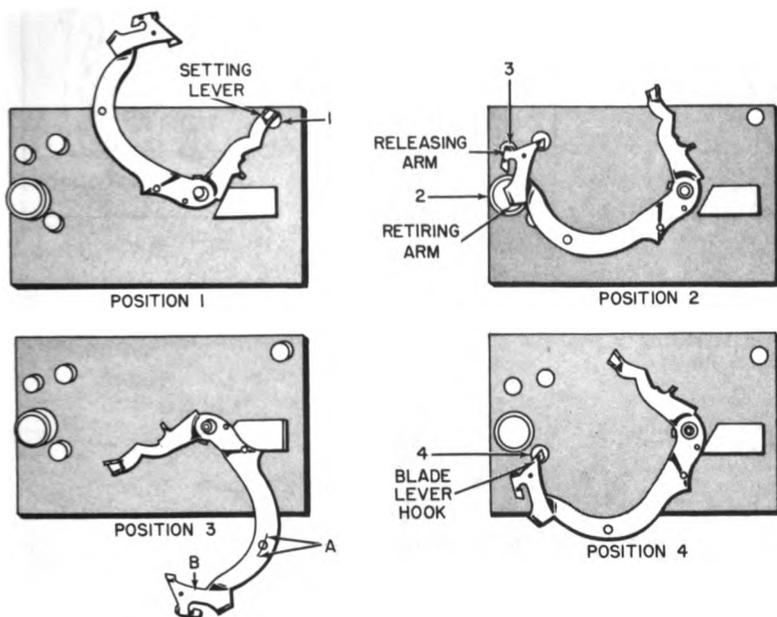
Between-the-lens shutter reassembly, stages one and two.
